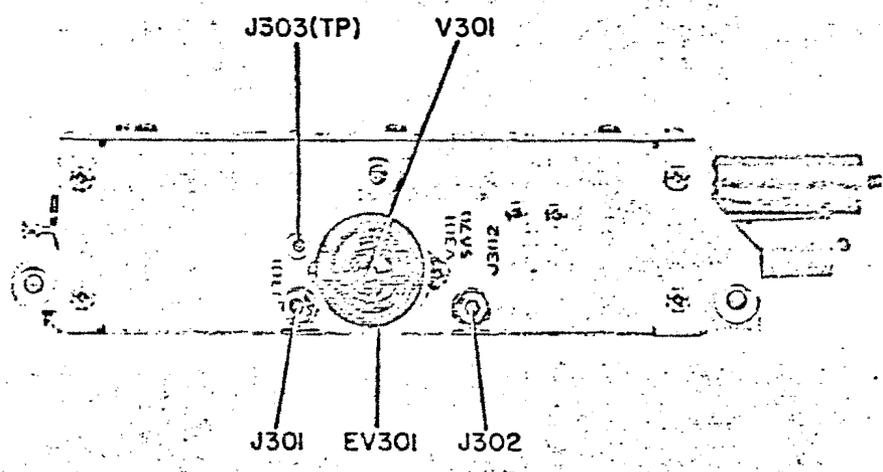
High-Frequency Oscillator, Right Side View, Location of Parts
